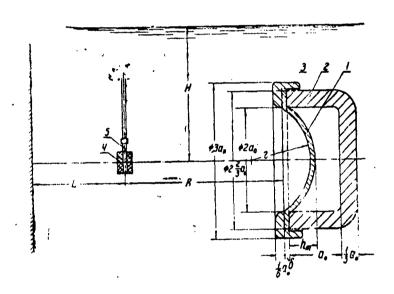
Arrangement of the equipment for carrying out experiments in explosive forming
